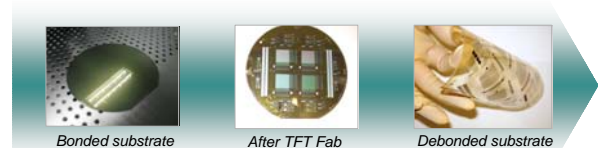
HS-PEN substrate at different stages of processing: (left) bonded to Si prior to TFT fabrication; (middle) after 64x64 TFT array fabrication; and (right) after debonding
